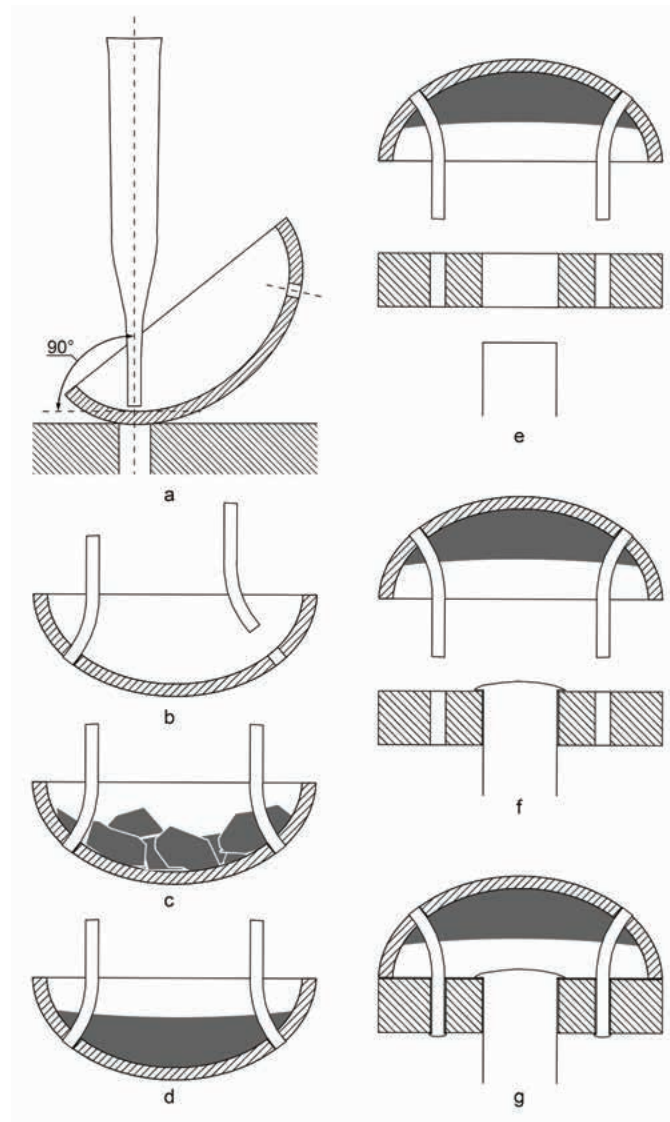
Possible method of assembling the upper hilt of sword No. 723; a – holes for rivets were cut out perpendicularly to the pommel surface; b – two rivets were formed to fit into the holes; c – hollow of the pommel was filled with pieces of iron slag; d – the slag pieces were melted in order to secure the rivets into the pommel; e–f – upper guard was attached to the tang; g – the pommel was attached to the upper guard. Drawings by J. Hošek.
